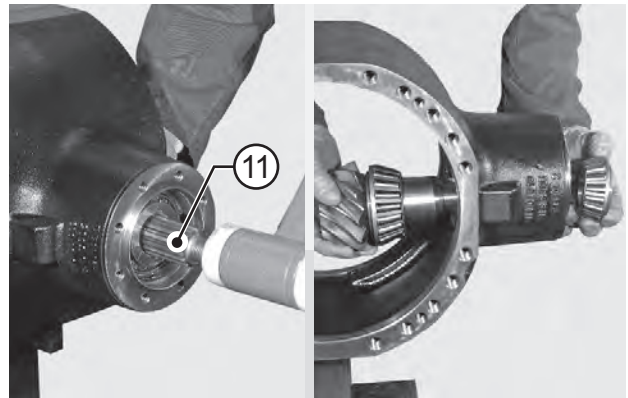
Extract the pinion (11) complete with the internal bearing cone (10), the spacer (7) and calibrated spacer (8).
